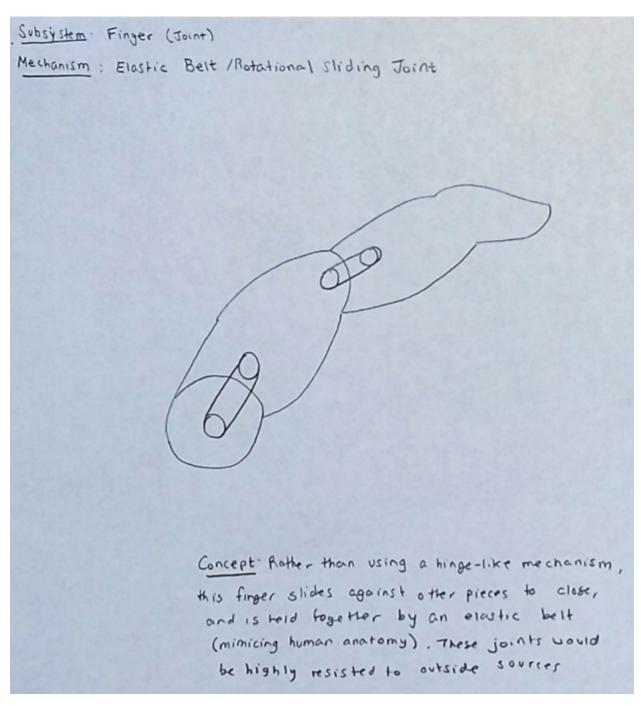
Elastic Belt / Rotational Sliding Joints Sketch
